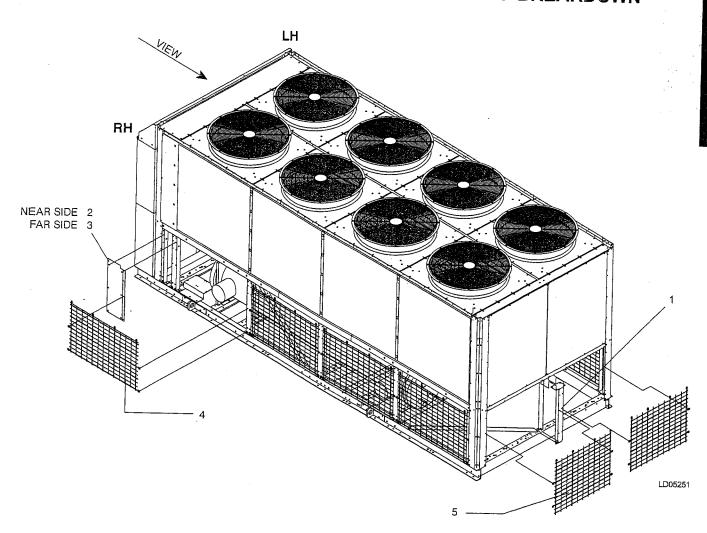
BOTTOM SECTION - WIRE ENCLOSURE - KIT NO. 375-29569-161 IS SHOWN.
